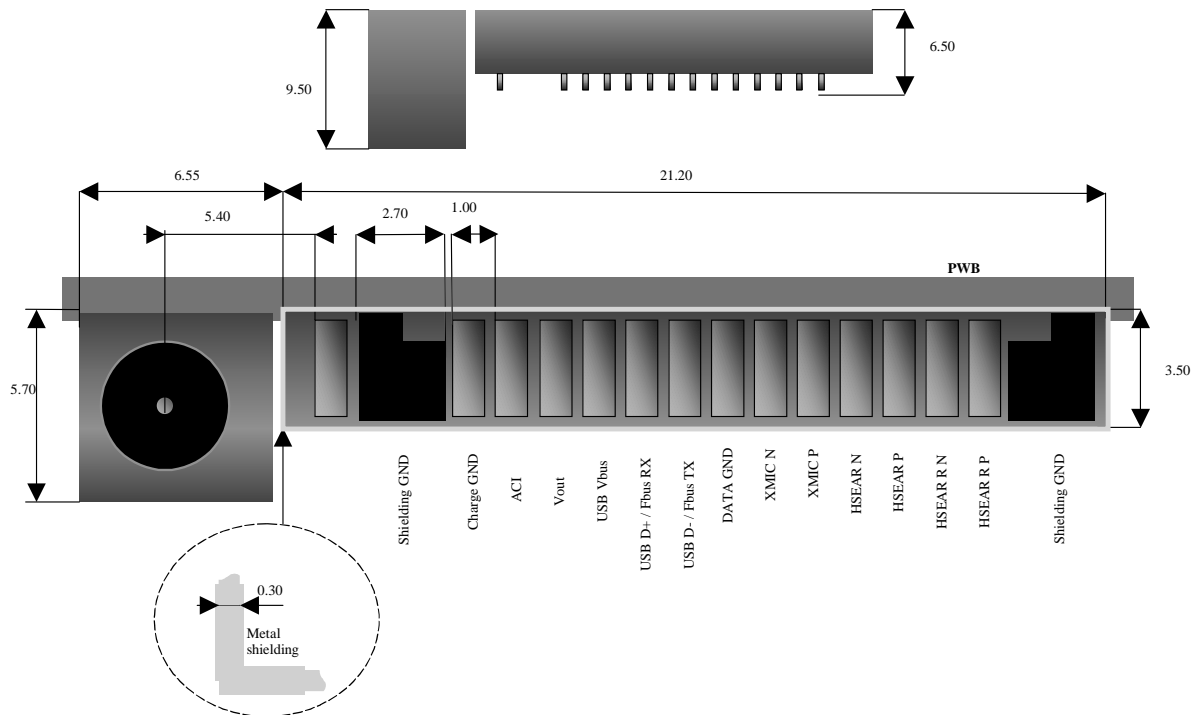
Mechanical dimensions and signals of Tomahawk bottom connectors
